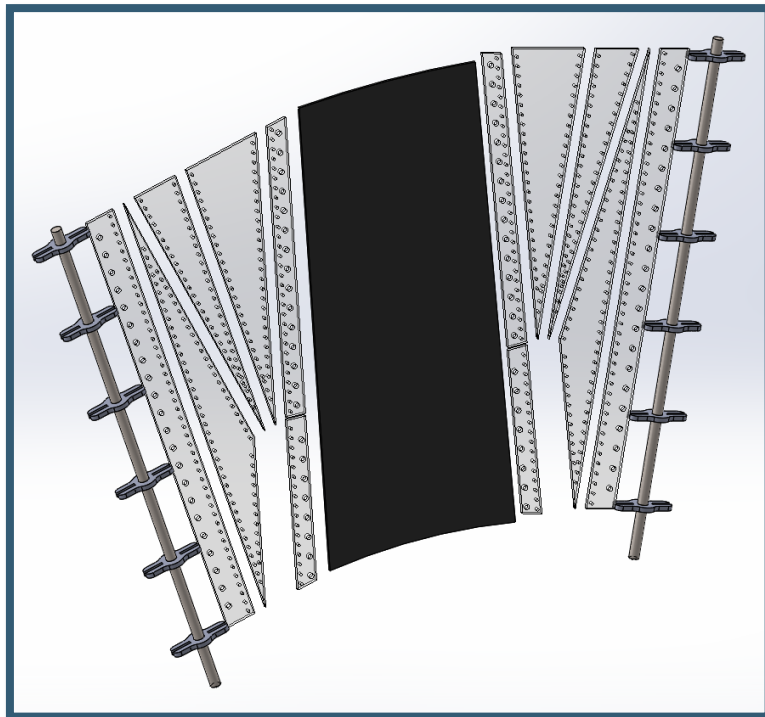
Exploded view of one segment of the hybrid fin assembly.
